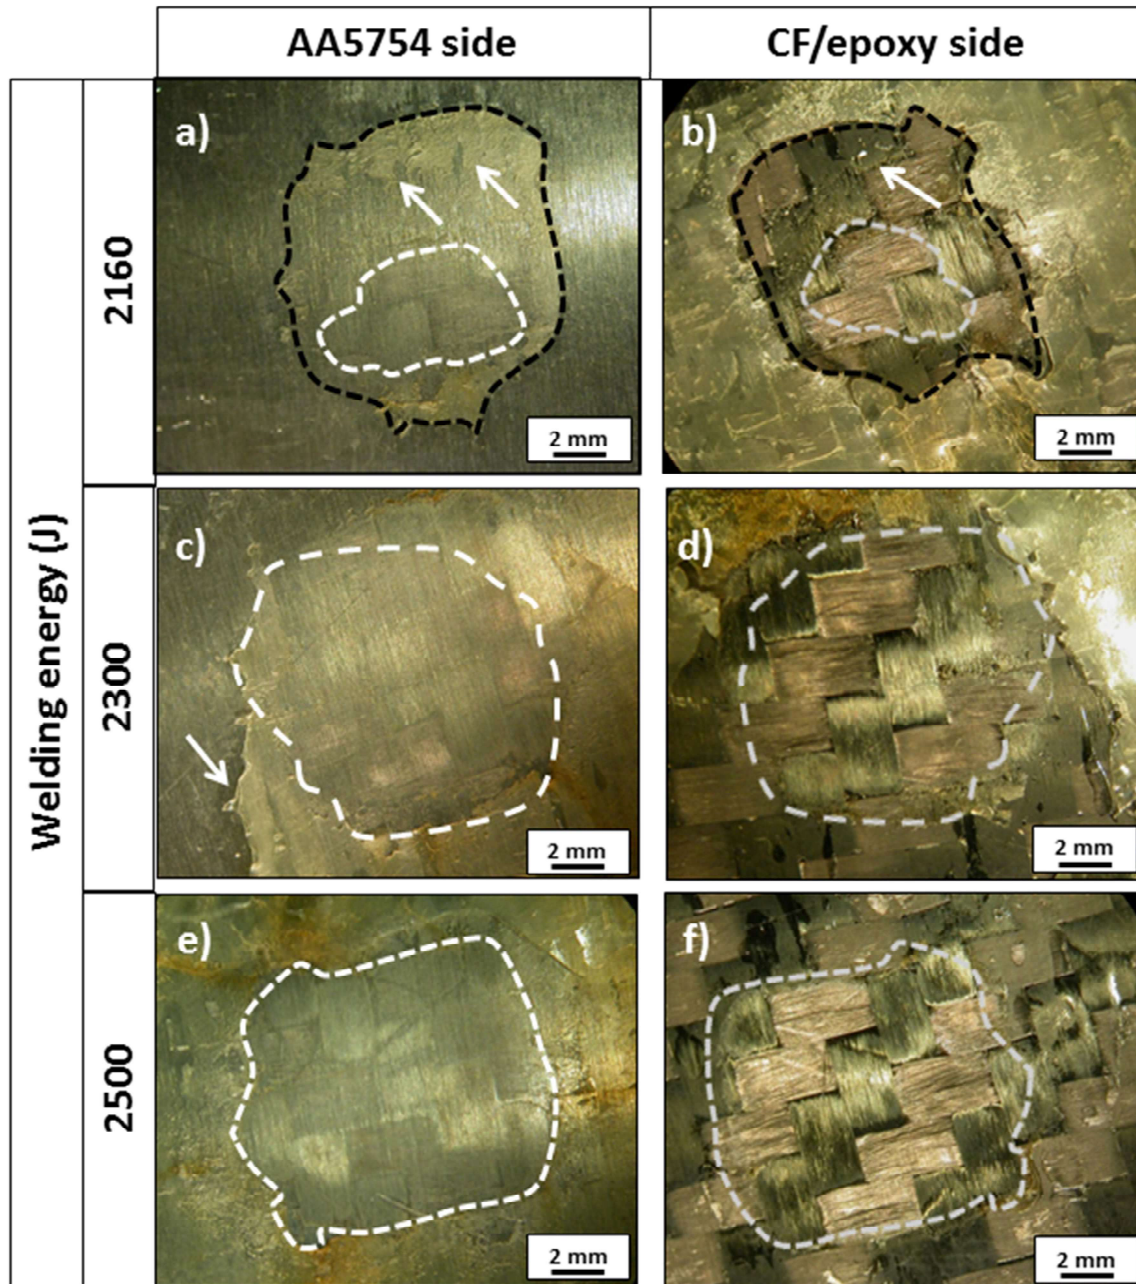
Fracture surfaces of hybrid Al/CF-epoxy joints welded at different welding energy and a constant welding force of 280 N (A: adhesion zone; I: mechanical interlocking zone).
